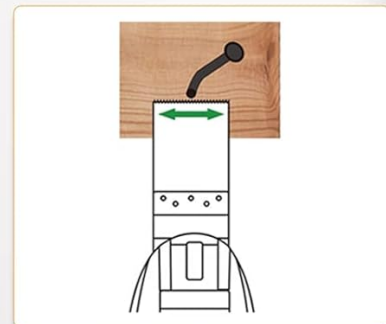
Guidance on proper cutting techniques to optimize performance and prevent tool damage.
